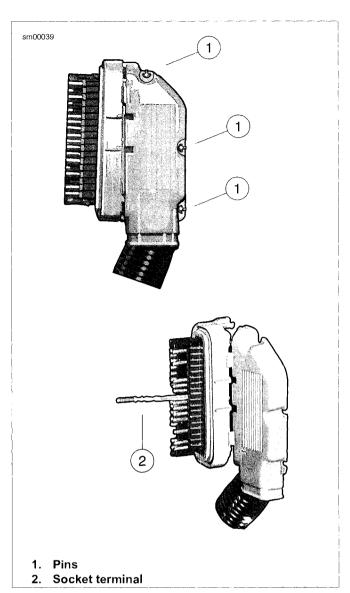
Packard 100W Connector: Separate Halves of Socket Housing
